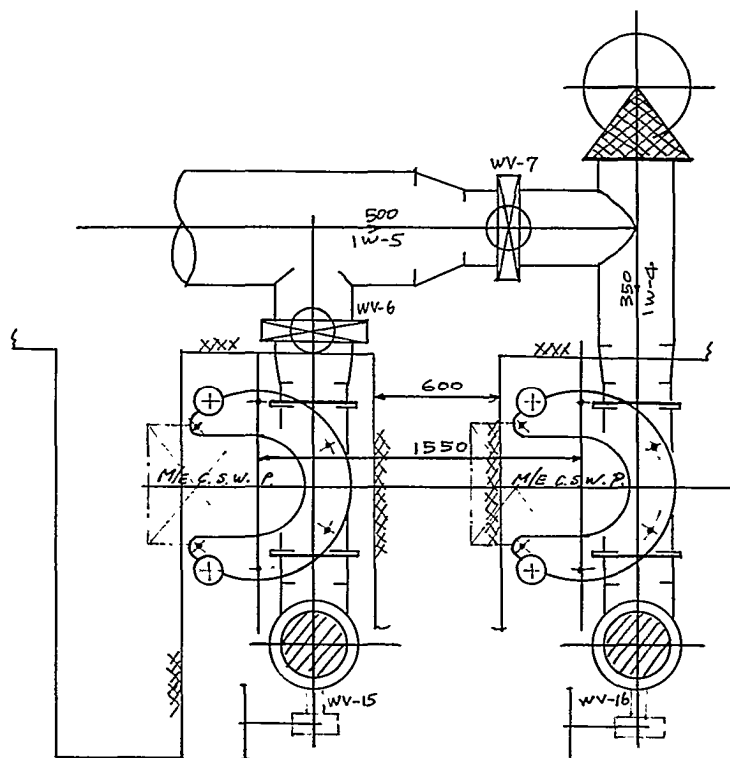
Defining Pipes and Valves Attached to Auxiliary Machinery.
